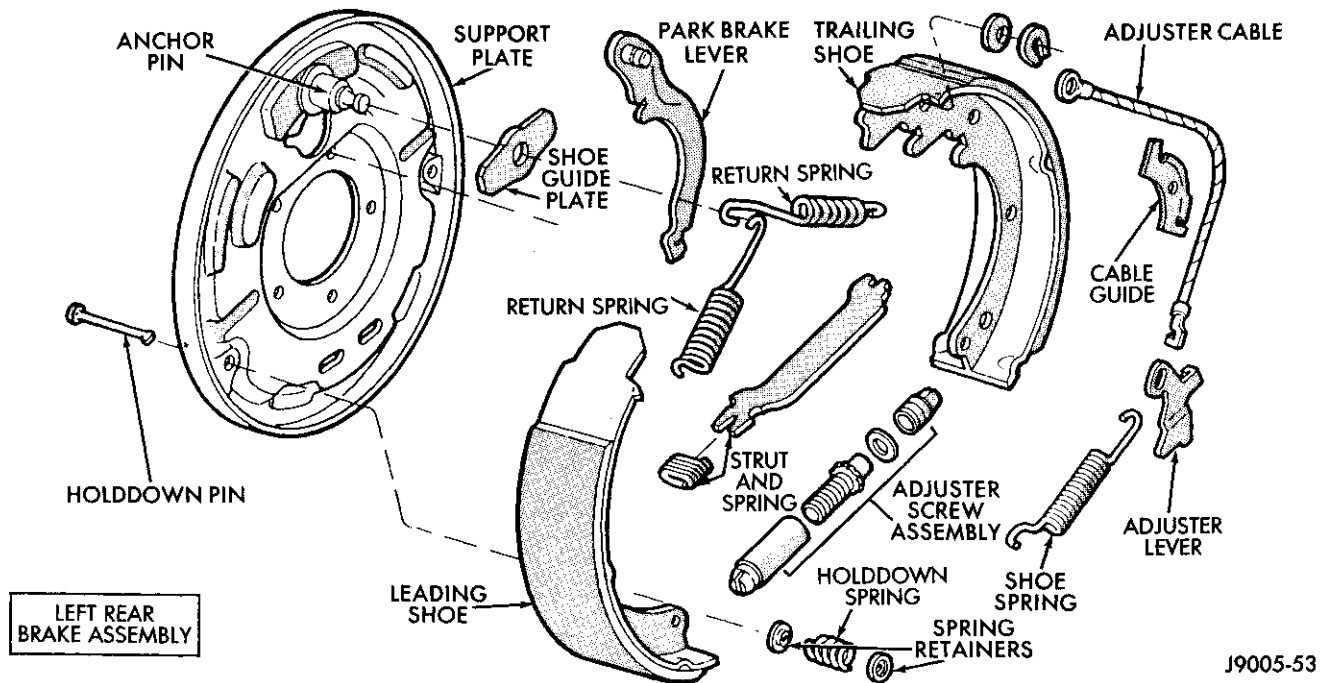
Ten Inch Drum Brake Components—MJ Metric Ton
